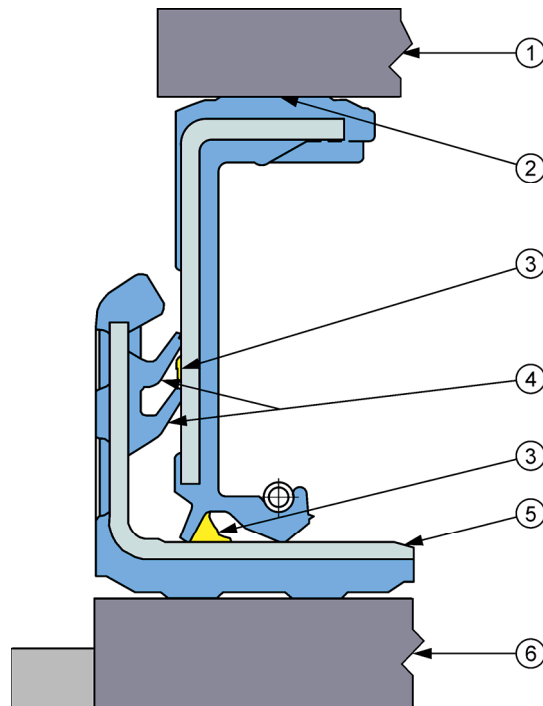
Quadrilip seal (courtesy of Siemens).
